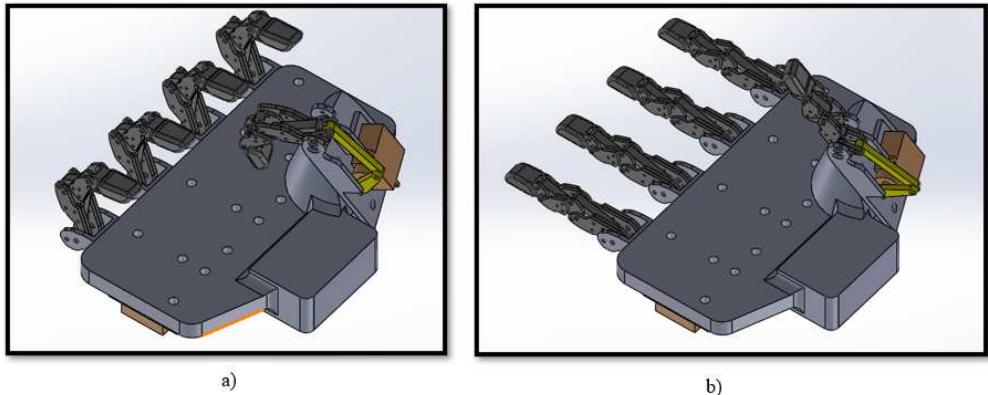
MyHand assembly grasping (flexion) and opening (extension) bottom view.
